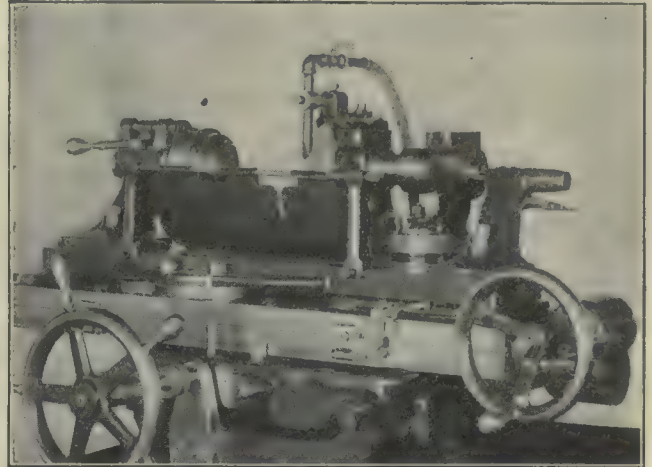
MACHINE FOR GRINDING FLANGES OF SPOOL
